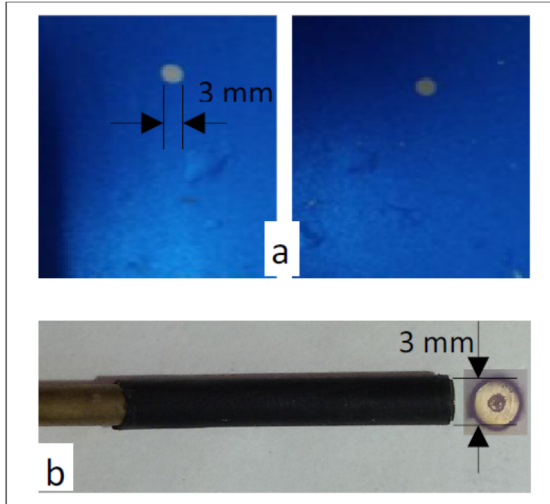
(a) Masked workpieces with 3 mm diameter hole and (b) 3 mm diameter isolated brass rod tool electrode
